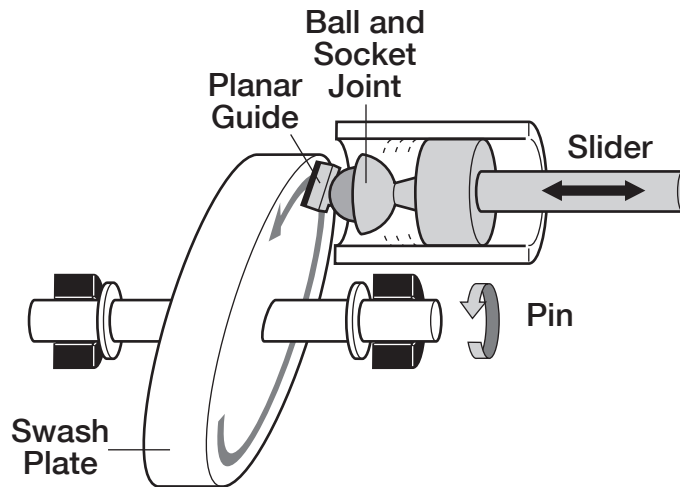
A 3-D swash plate mechanism that converts rotary motion into reciprocating motion.
